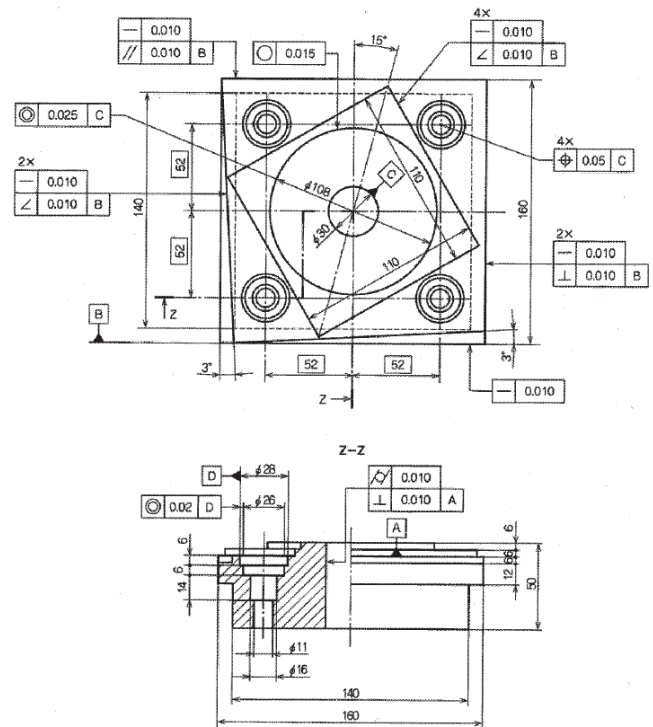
Shape and standard value of workpiece ISO 10791-7, M1\_160
